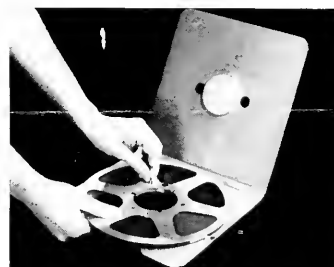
FIG. D. — Inner section of box in same position as Fig. C, showing one reel flange in place and sleeve screws being inserted.
